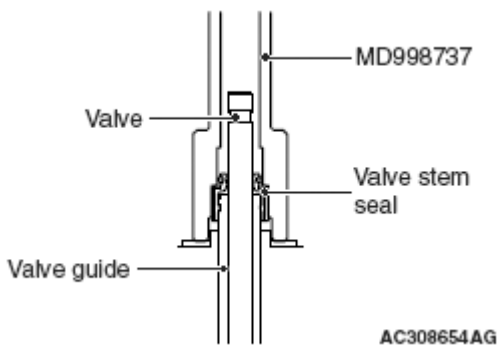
Pressing Valve Stem Seal In Valve Guide
